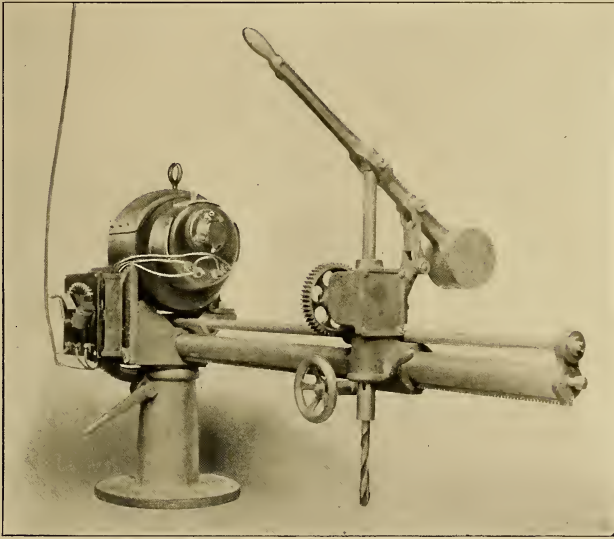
A PORTABLE ELECTRIC RADIAL DRILL, MADE BY THE STOW FLEXIBLE SHAFT CO., PHILADELPHIA, FITTED WITH GENERAL ELECTRIC I-H. P. MOTOR
